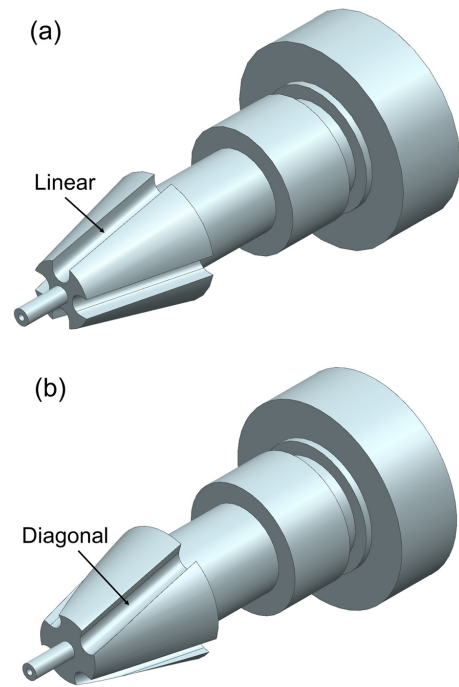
Proposed nozzle design (a)Linear type (b) Diagonal type
